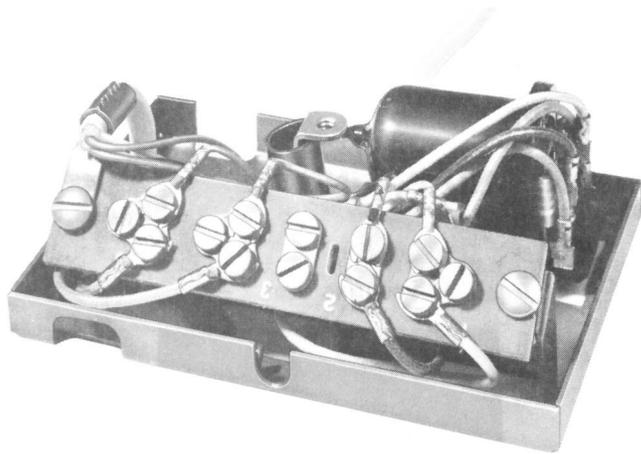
74-Type Connecting Block With New Cord Stay Arrangement and Screw-Mounted Terminal Strip
